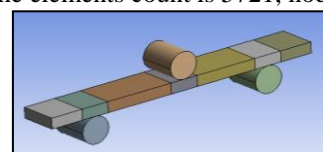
Solid Model – Without Weld Aluminium 5052 Plate – 150*20*6 mm
